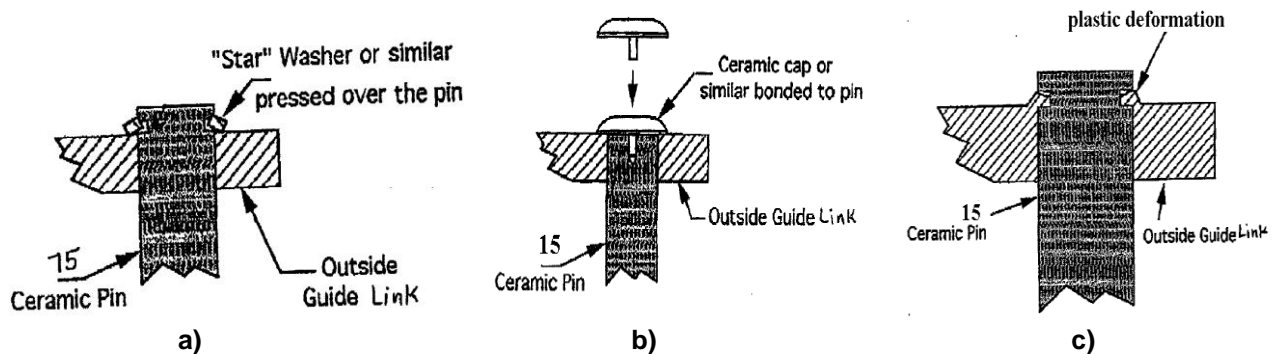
a) Ceramic joint pin-plate-washer assembly;
